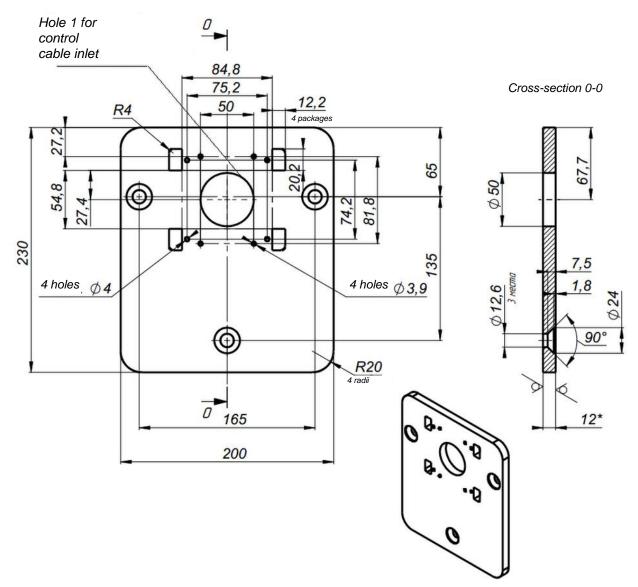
Installation dimensions (Provided a drawing of the bottom support of the turnstile)
